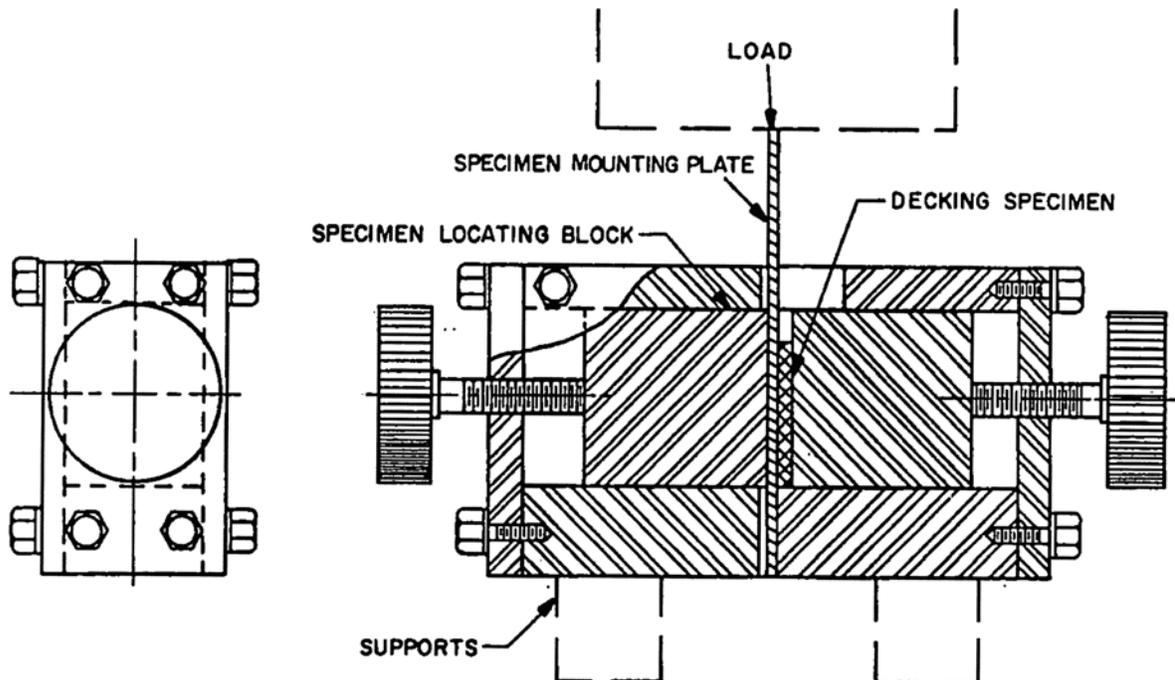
Shear test jig for hard-setting deck covering materials.
